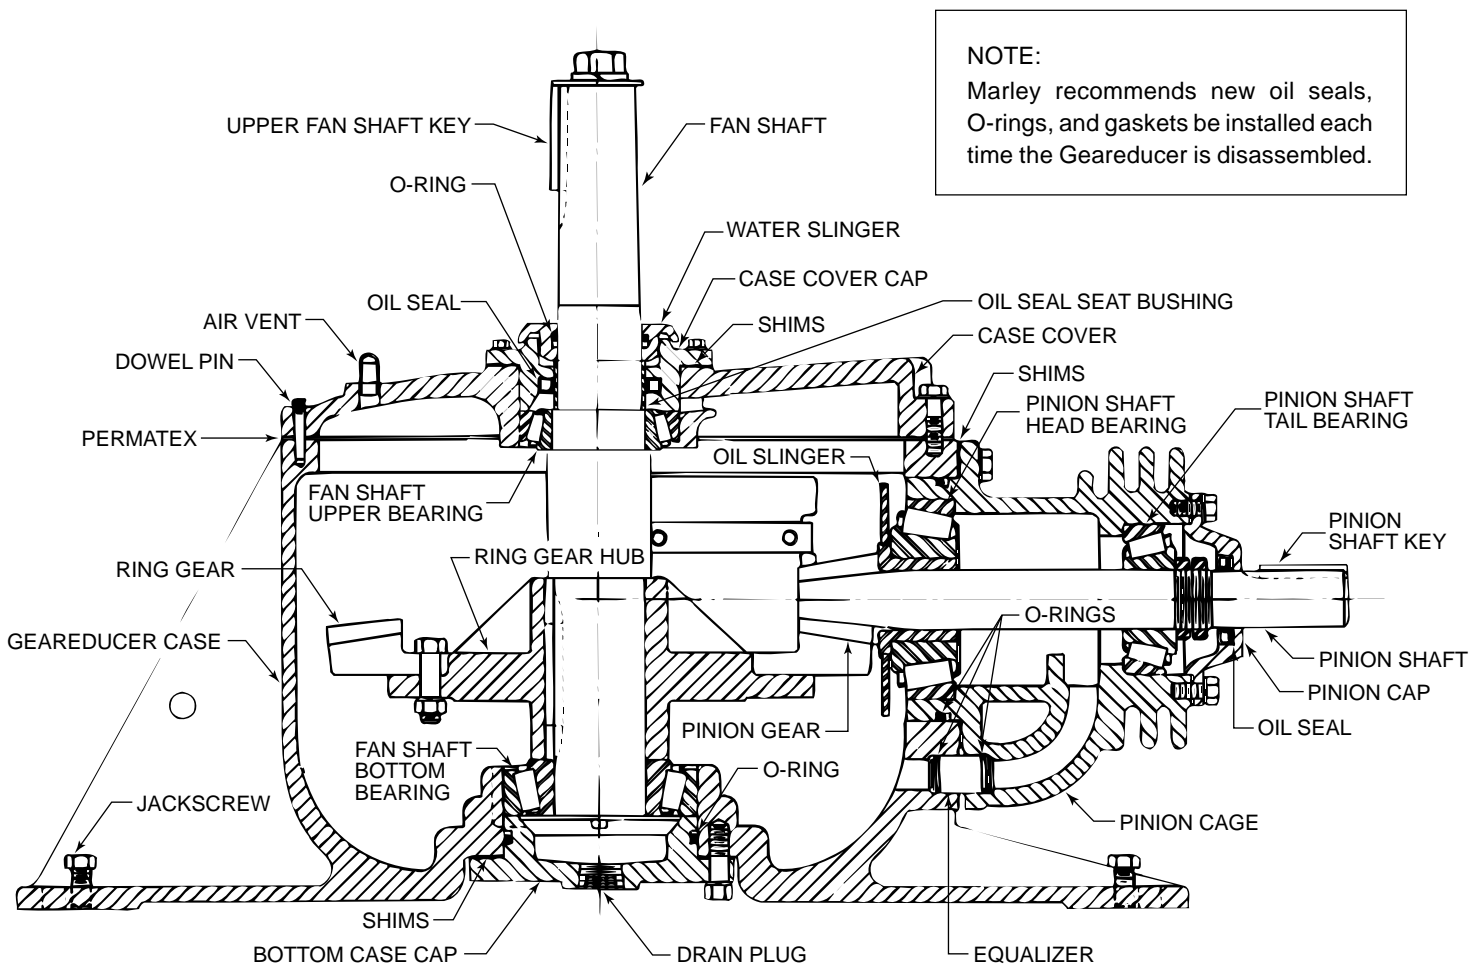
Cross Section of Series 27A Geareducer with Lip Type Fan Shaft Seal
